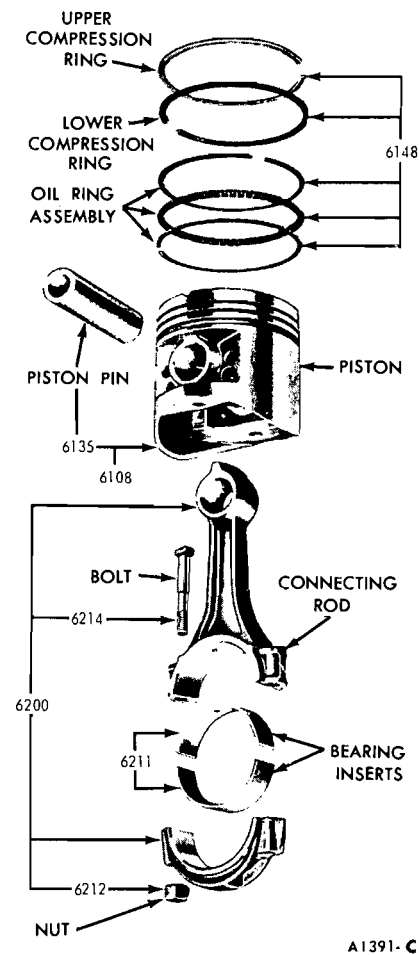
Typical Piston, Connecting Rod and Related Parts
